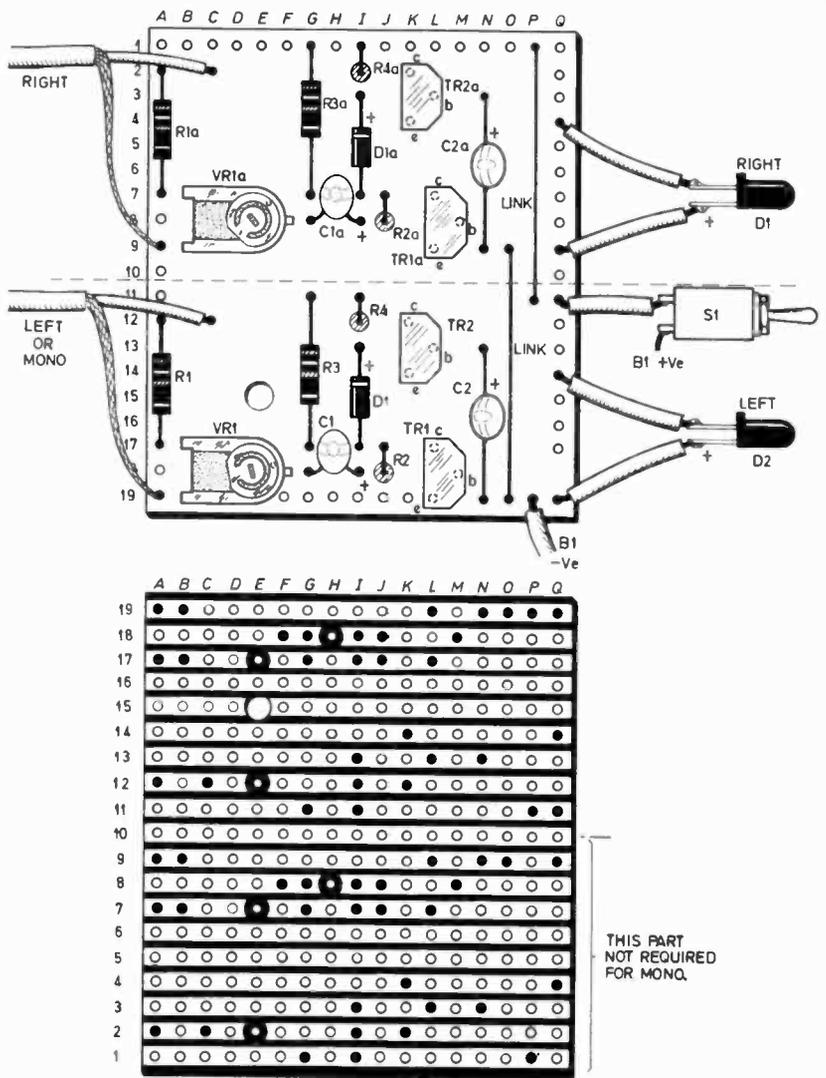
The stripboard with components in position and view of underside showing breaks in the strips.
